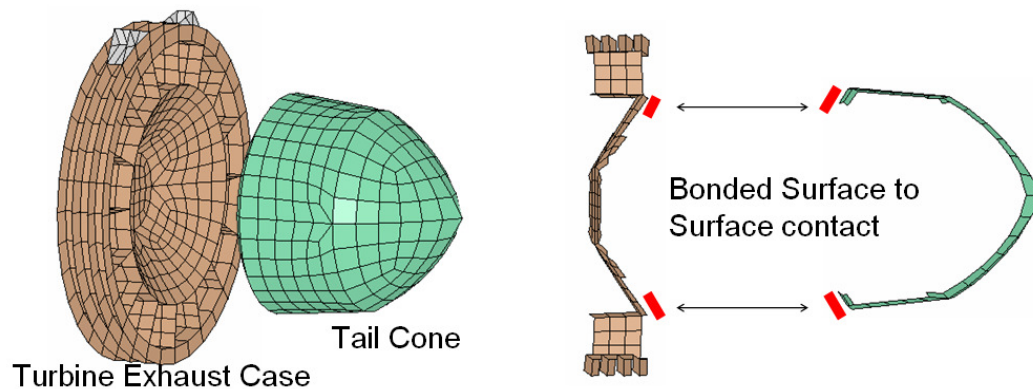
Example of surface-to-surface bonding used to simulate bolted joints.
